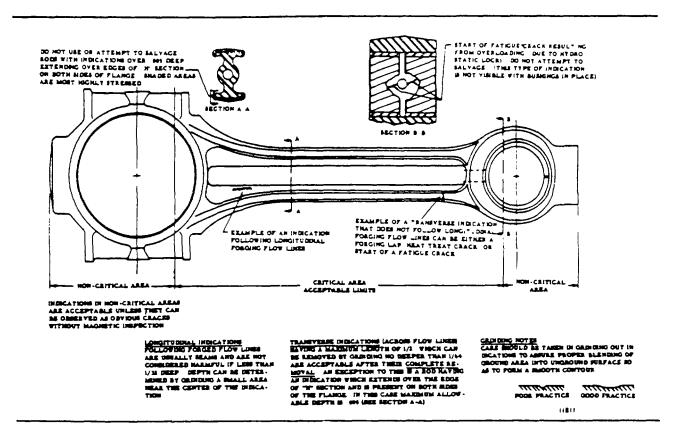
Magnetic Particle Inspection Limits for Connecting Rod.
